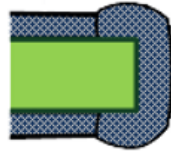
Shape and size of boxing fillet welded joint specimen
